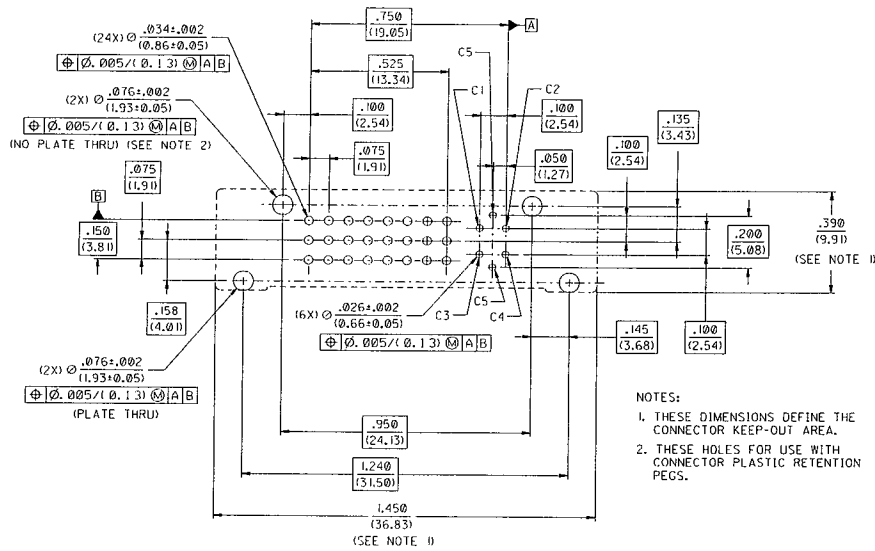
Recommended PCB Layout for Right Angle DVI-I Receptacle
